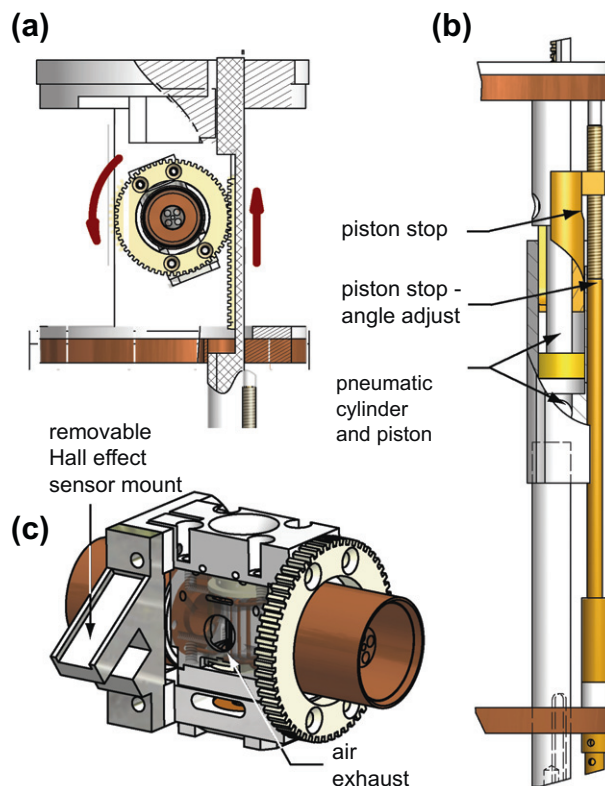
(a) Linear motion of the piston is converted into the angle switching of the spinner through a rack-and-pinion gear. Molded nylon 14 1/2° pressure angle spur gears and 56-teeth 48-pitch pinion were used. The rack is mounted on a Delrin support rod attached to the piston rod. Its axial alignment is maintained by holes in the base plate and in the top lid of the probe. The top opening is semicircular, preventing rotation of the rack support. (b) The pneumatic cylinder, supported by a 3/8" Delrin rod, can be moved up or down by an actuator with a 10–24 thread on the bottom. To keep the rod from rotating, it has a 1/8" slot on the side that accommodates a 4–40 screw in the middle of the copper plate. This combination of the gear pitch diameter and the thread pitch of actuator rods for the cylinder and the brake disk makes the angle adjust 4.1° per knob turn for θ_1 , and 3.1° per turn for θ_2 . (c) Stator detail showing the coupling capacitors, coil, spinning hardware (Varian 3.2 mm pencil system), and the removable bracket for the Hall effect sensor. In MAS probes, the Hall sensor is usually mounted directly on the stator [37] and calibrated by recording the voltage when the stator is at the magic angle, measured by maximizing the sidebands of KBr [38]. In an SAS probe, the sensor cannot be mounted on the spinner module during an experiment. Thus, the sensor is attached to the stator by a removable bracket and calibrated, with the Hall voltage recorded for a range of angles.
